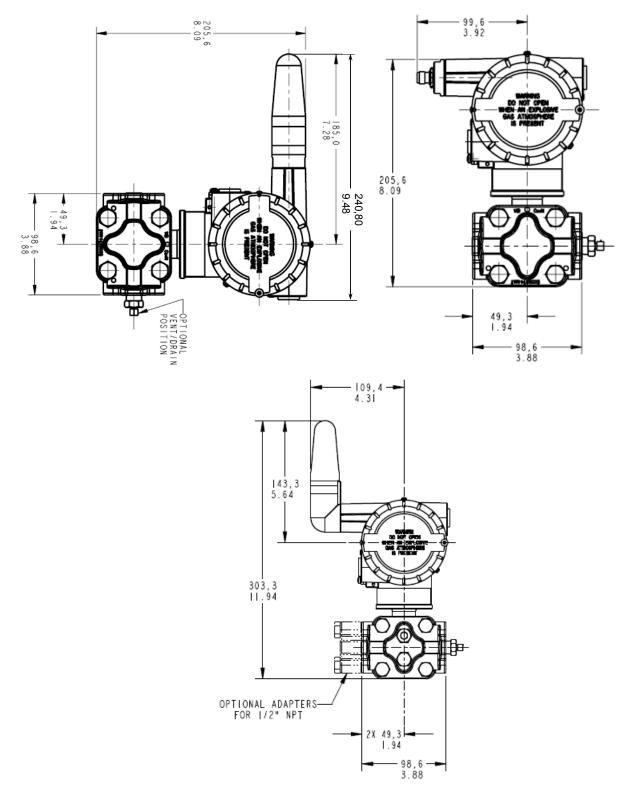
Typical mounting dimensions for STDW924, STDW930 and STDW974 (rear view)
